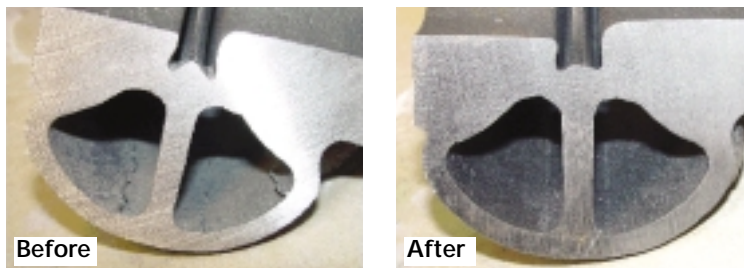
Internal finish before and after the introduction of RHEOTEC XL coating
